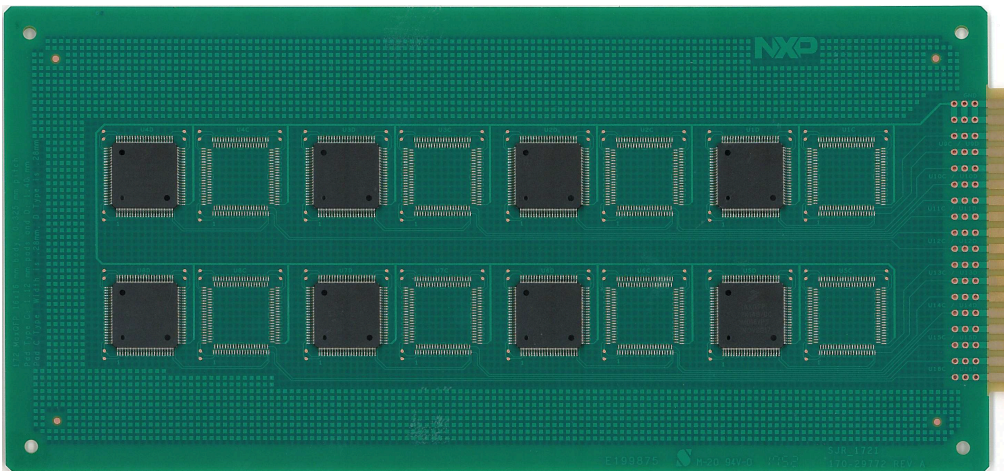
172 HDQFP PCB for Board Level Reliability Testing
